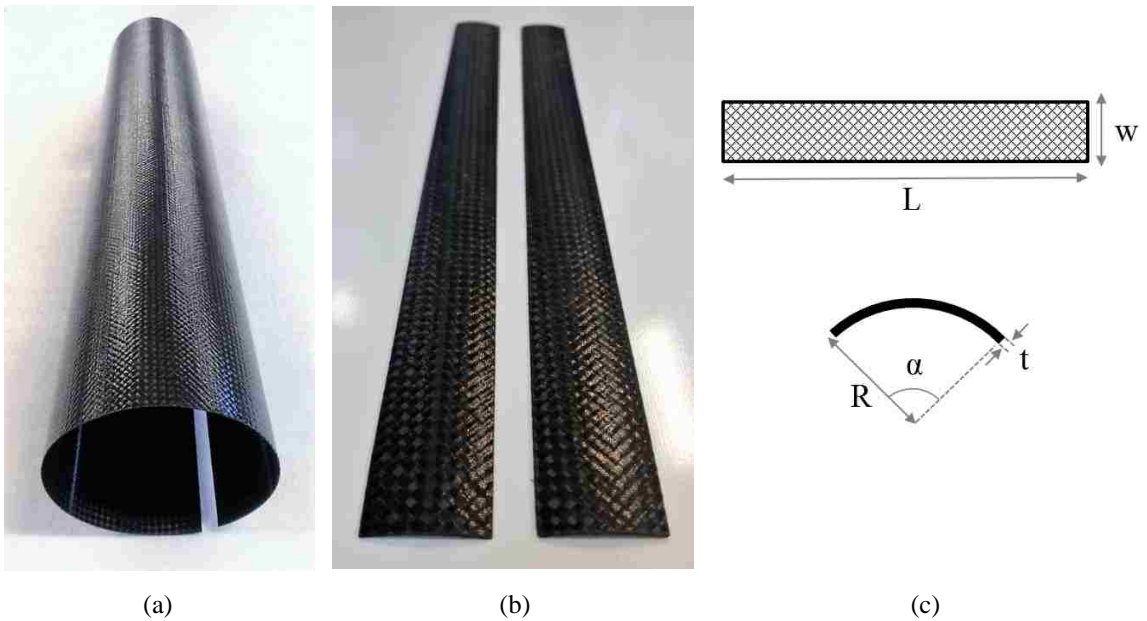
(a) Section of CFRP slit tube, (b) tape spring test specimens cut from slit tube, and (c) tape spring test specimen schematics.
